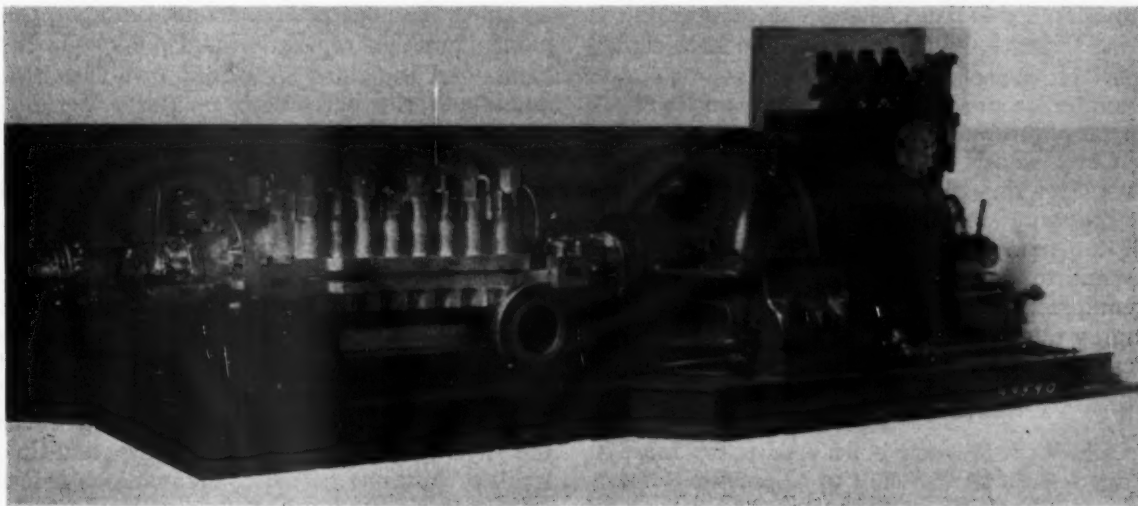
Boiler feed pump of split-casing type designed to feed a 1400-lb boiler
